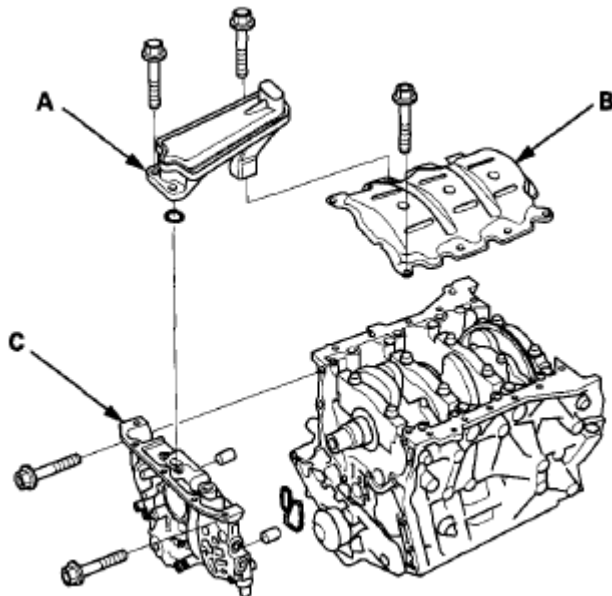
Removing Oil Strainer, Baffle Plate And Oil Pump
